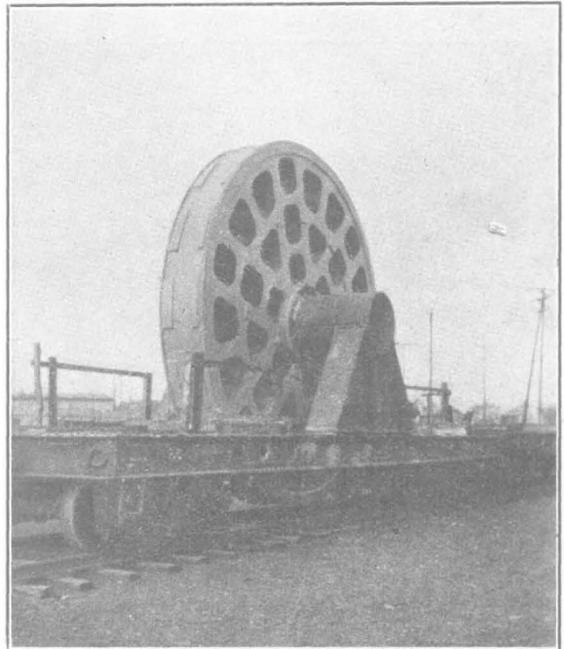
BASE OF TUBE FOR 200-INCH TELESCOPE. THIS WILL ALSO SERVE TO SUPPORT THE MIRROR DISK ON THE GRINDING MACHINE.
